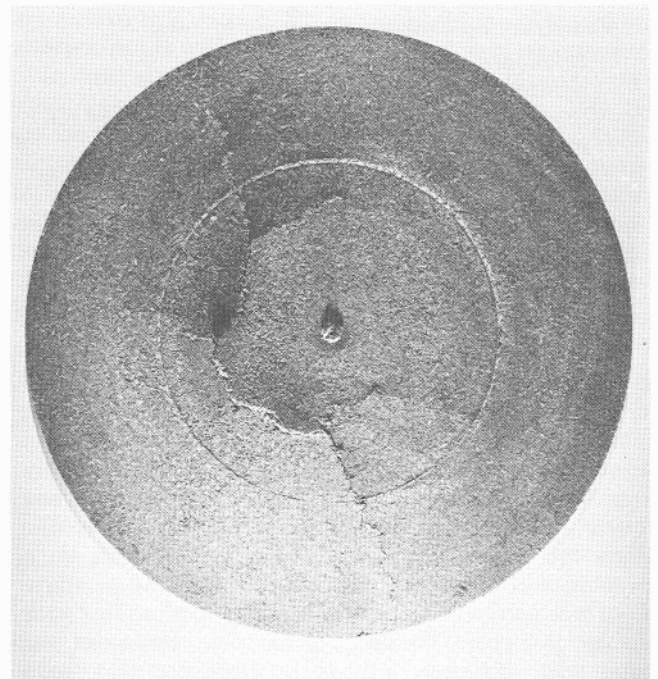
Failure pattern in center load test for flange No. 9. (The 13-1/2-inch-diameter ridge showing in the photo is due to an imperfection in the caul plate and is of no significance.)
